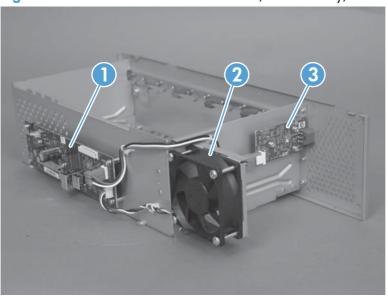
Remove the interconnect PCA, fan assembly, and DC connector PCA (5 of 6)
